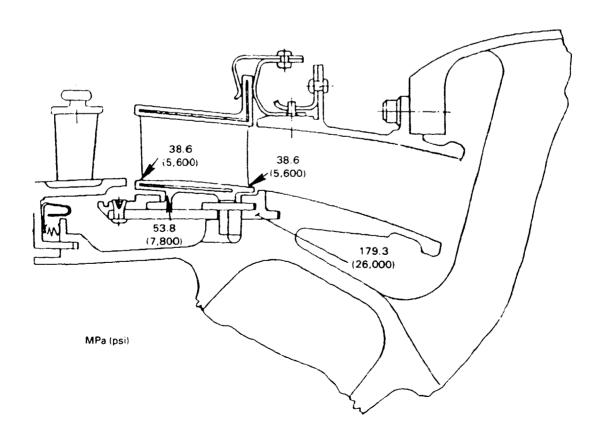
High-Pressure Compressor Exit Guide Vane Assembly Stress Summary
